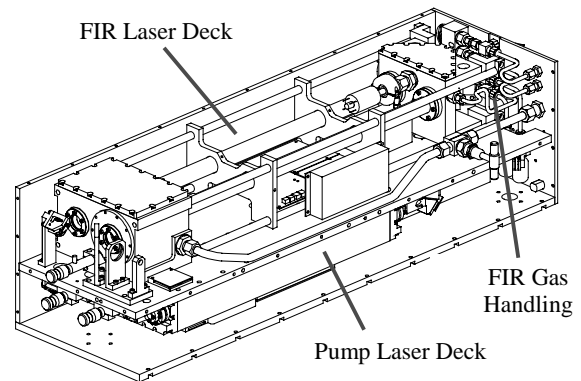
Drawing of the SIFIR EOM with the sides removed.
